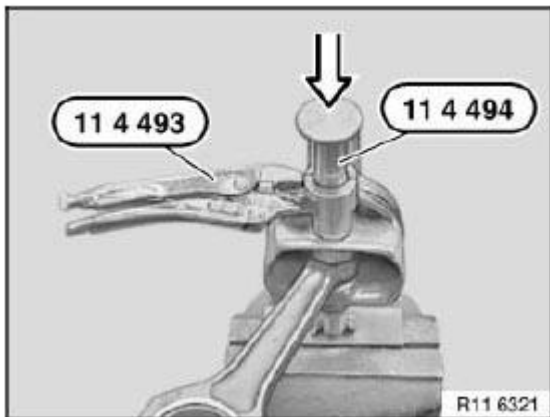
Identifying Special Tool (11 4 493 And 11 4 494)
